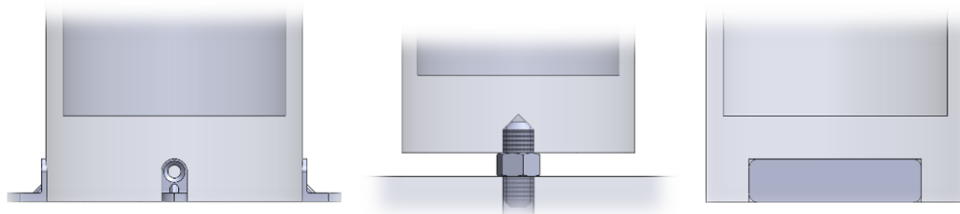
Single bolt threaded to base (a) magnet of bottom of well (b) lip with screw holes around base (c)
